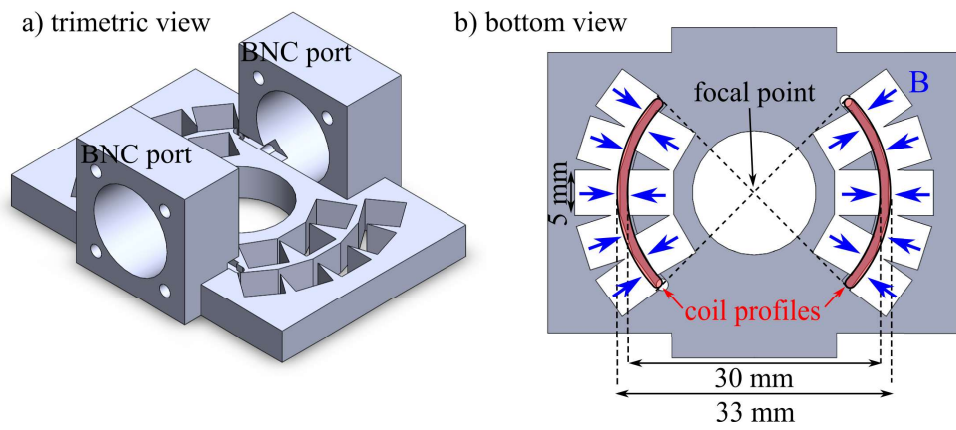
a) trimetric view of the 3D printed holder created for a focused edge field EMAT design. b) bottom view of the holder with the coil positions and the magnetic field directions added. The magnets are 5 mm cuboidal, N50, NdFeB.
